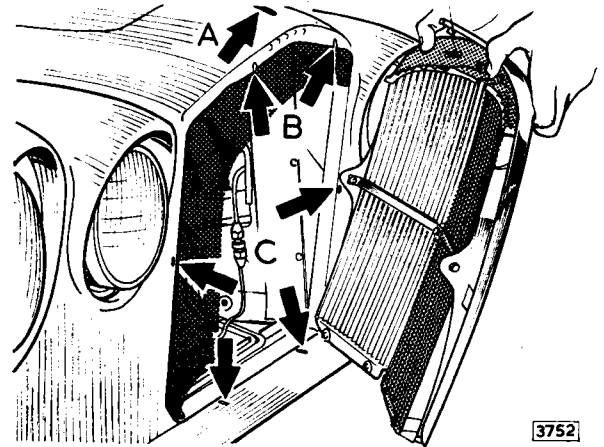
Showing the mounting points for the radiator grille (Early cars)
